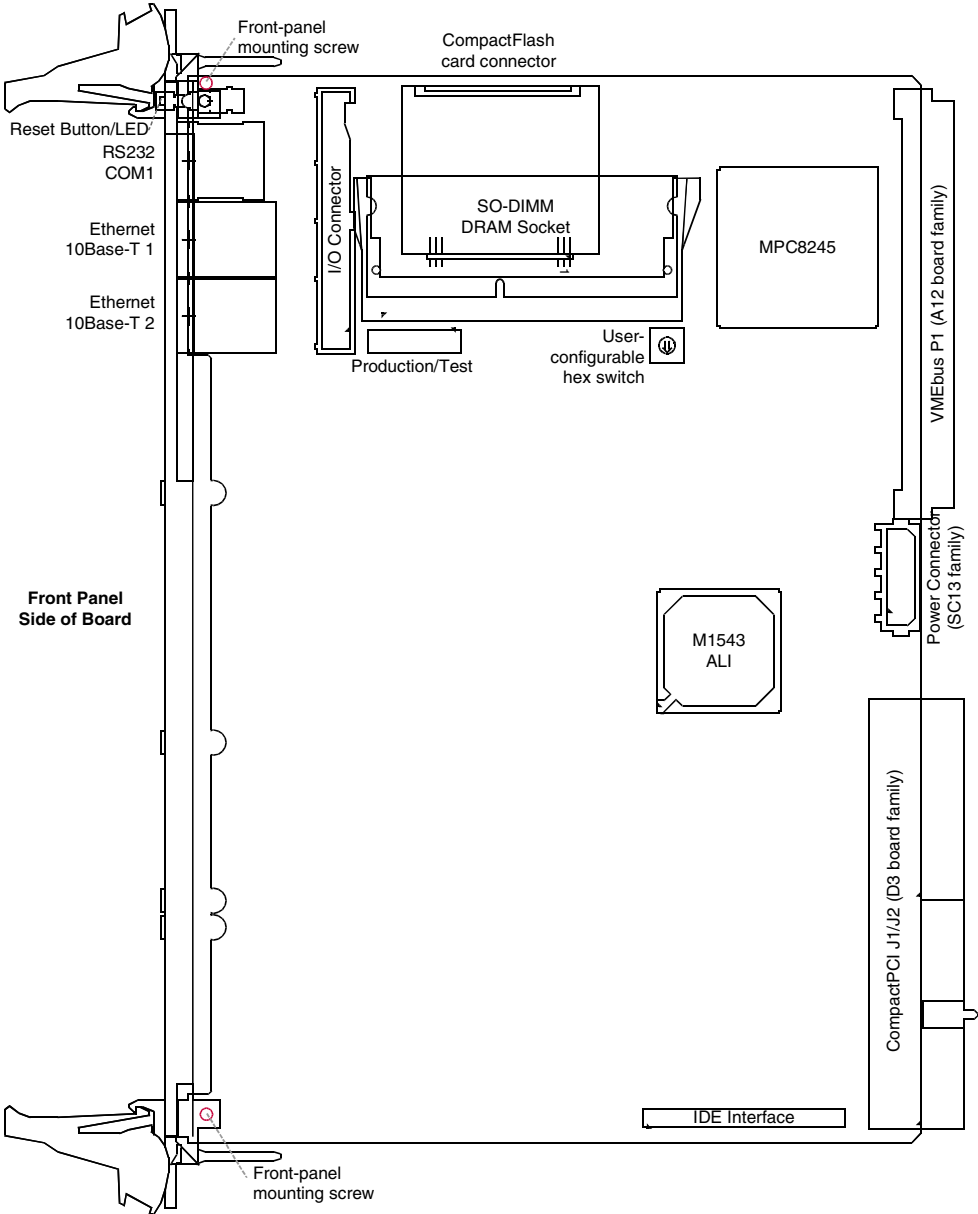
SC13a Board Map—CPU Board with PC•MIPs - Top View
